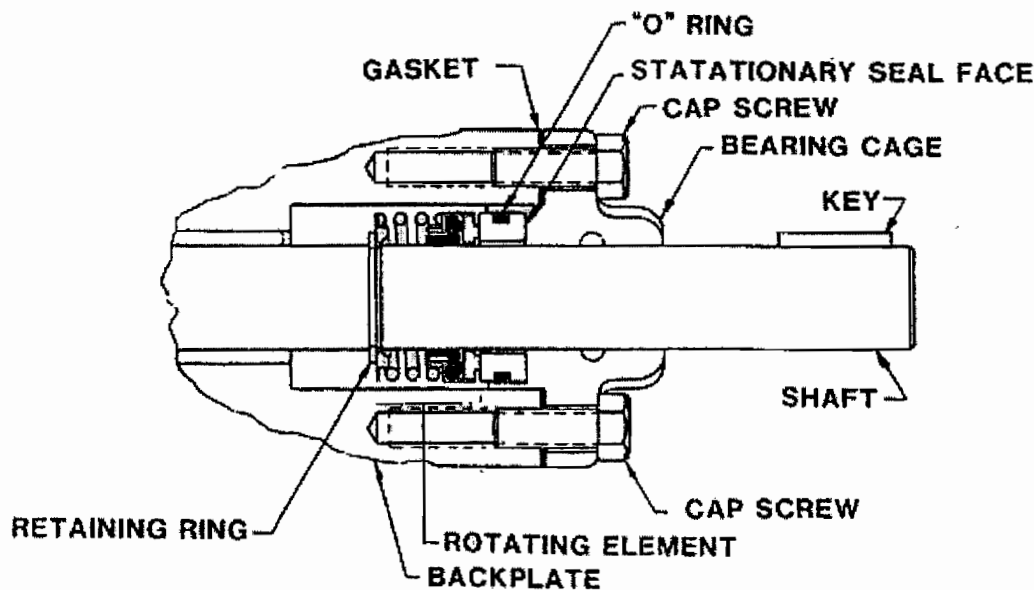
Mechanical Seal (Fuel Oil Transfer Pump).
